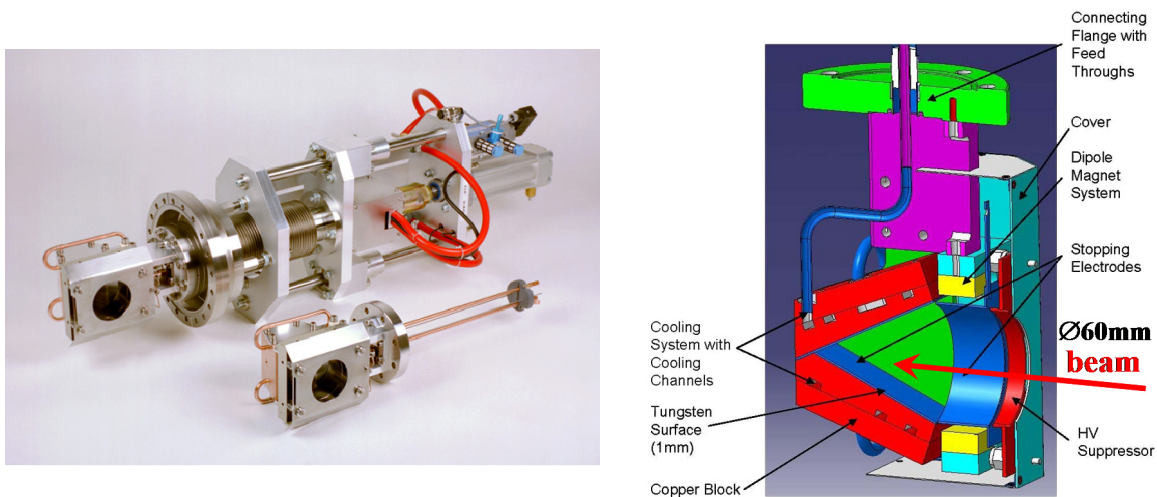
Left: Photo of a Faraday cup and beam stopper for high intensity beams as installed at the high current LINAC at GSI. The pneumatic drive is mounted on a \varnothing 150 mm flange. Right: The technical drawing of the same Faraday cup and beam stopper of high intensity beams. The opening of the cup is \varnothing 60 mm.
